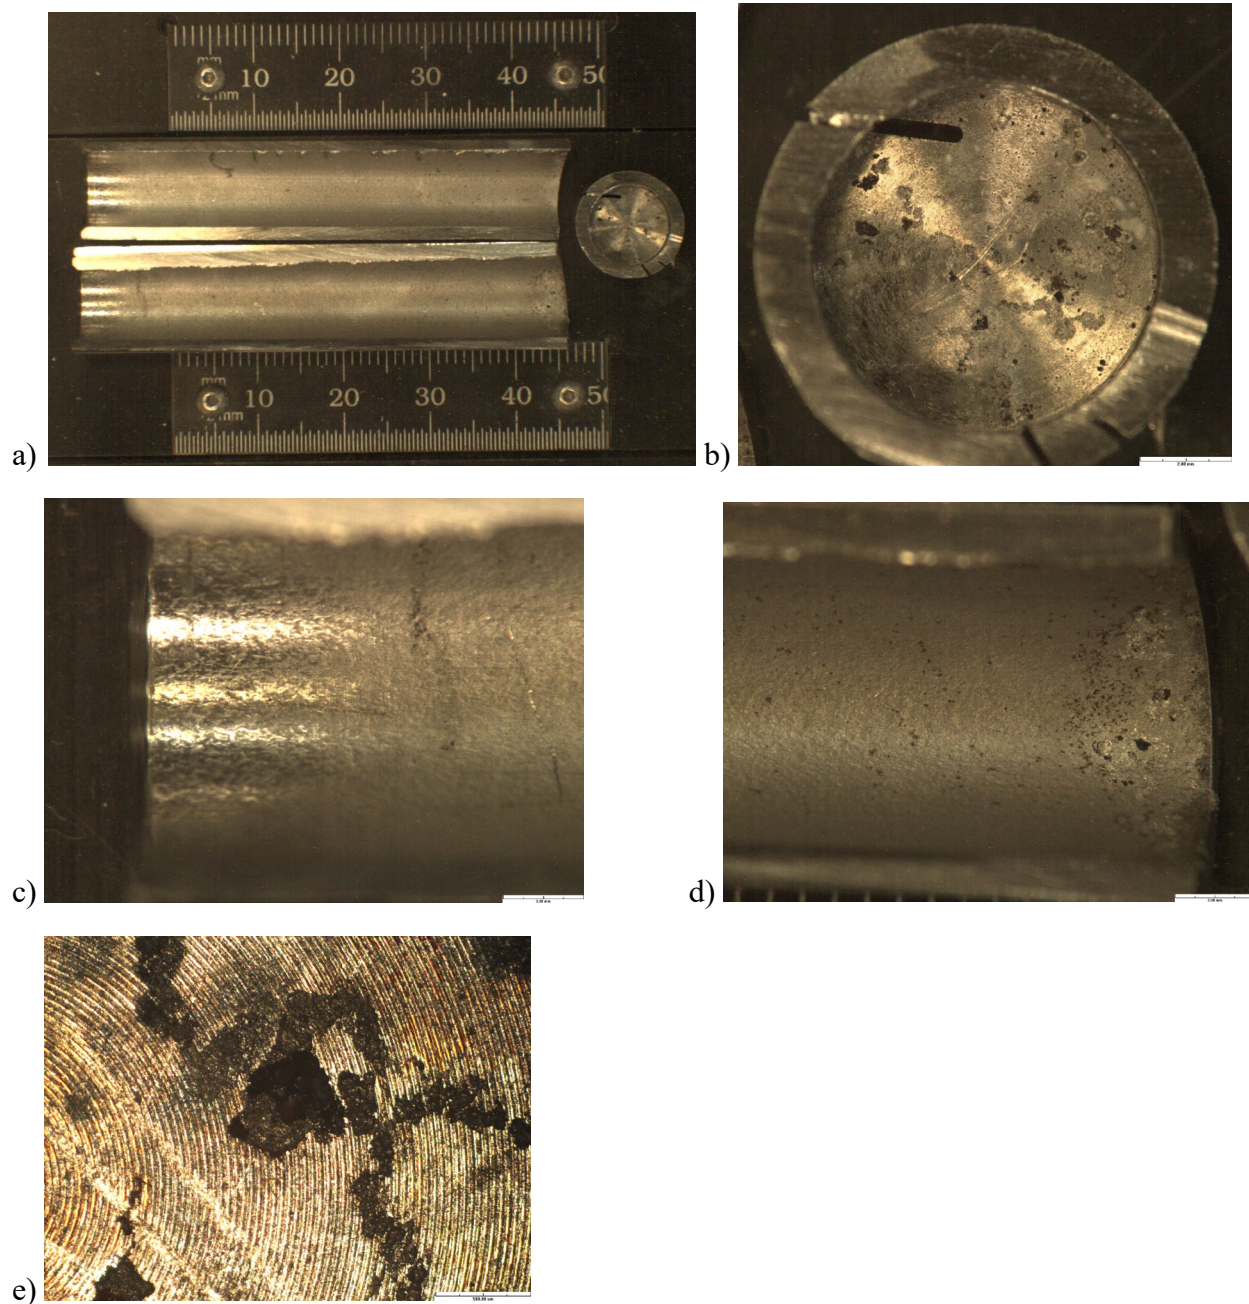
a) inner bucket b) bottom of inner bucket c) close up inner bucket wall in the headspace d) close up of the contact region of the inner bucket wall near the bottom e) close up of suspect corrosion/pitting on bottom of inner bucket
